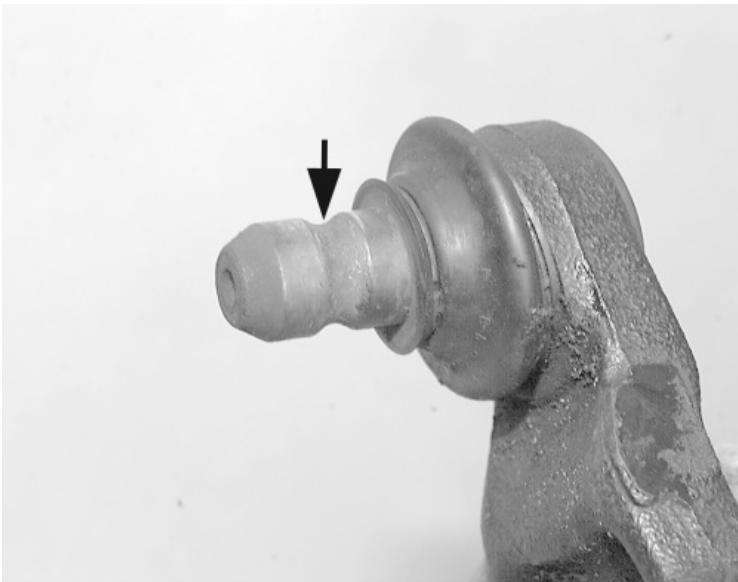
This groove is where the through-bolt passes and retains the ball joint to the spindle
